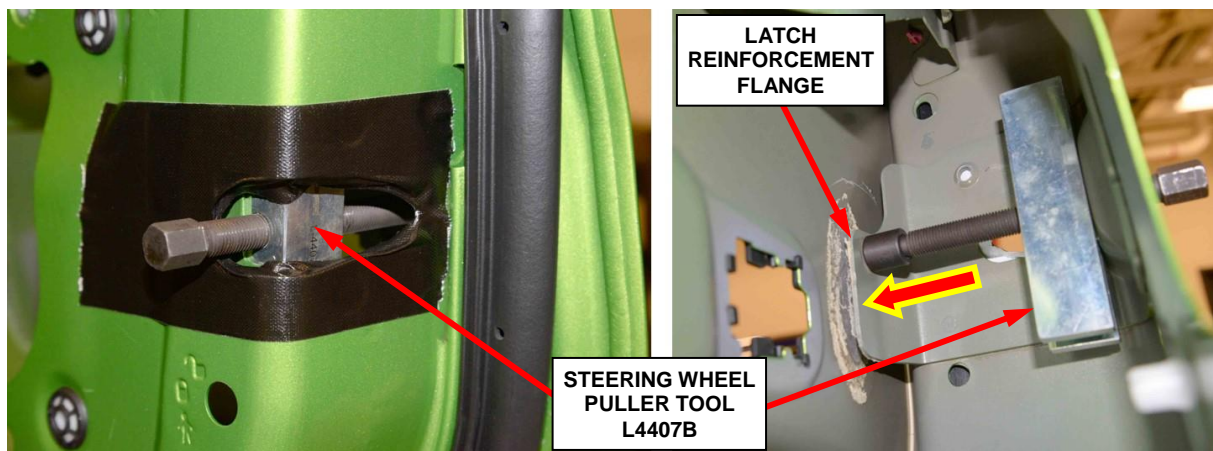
Bend the Latch Reinforcement Flange Toward the Door Skin
